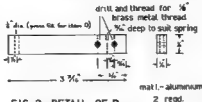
DETAIL OF B - 'DIT' AND 'DAH' BEAMS
